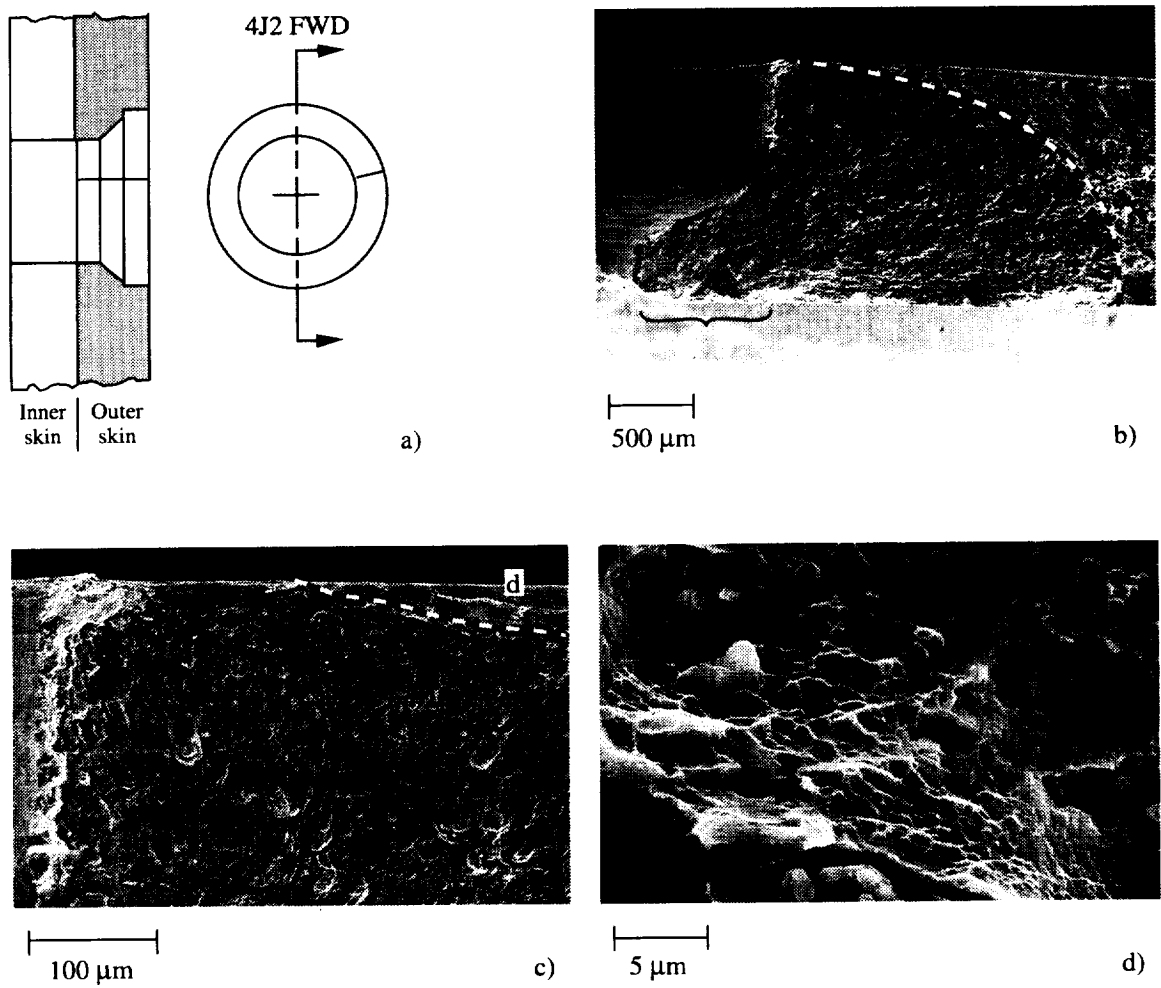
a) The schematic shows the rivet hole 4J2 configuration and the location of the outer skin fatigue crack oriented in the forward direction and above the 3 o'clock position. b) The SEM micrograph shows the fatigue crack fracture surface located at the outer skin rivet hole (left). The bracket marks the likely region of crack initiation and the dashed line marks the fatigue crack front. c) The SEM micrograph shows the fatigue crack front region (dashed line) as it intersects the outboard surface of the outer skin. The rivet hole is located to the left. d) The SEM micrograph shows the ductile morphology of the over load fracture surface at region "d" in Figure 11.11c at high magnification.
